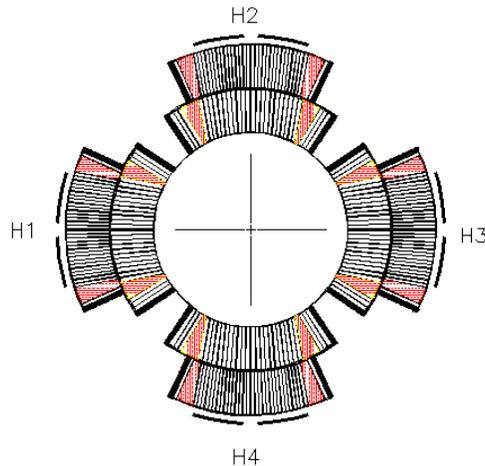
Heater placement in MQXB magnet. The 4 heater strips in H1&H3 form one heater circuit, the 4 heater strips in H2&H4 form another.
